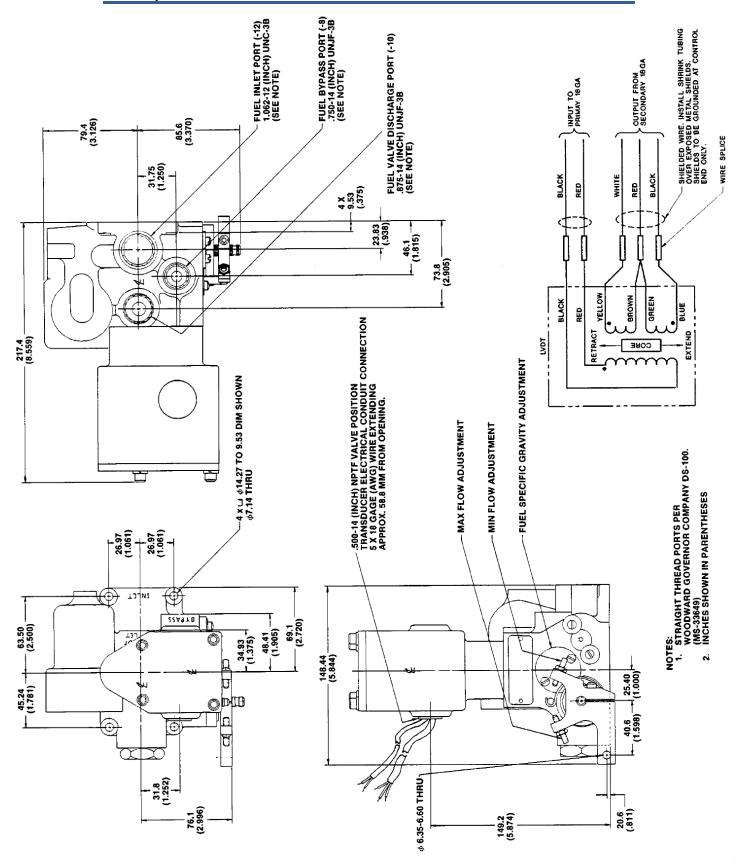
Outline Drawing and Adjustment Locations (Do not use for construction.)
